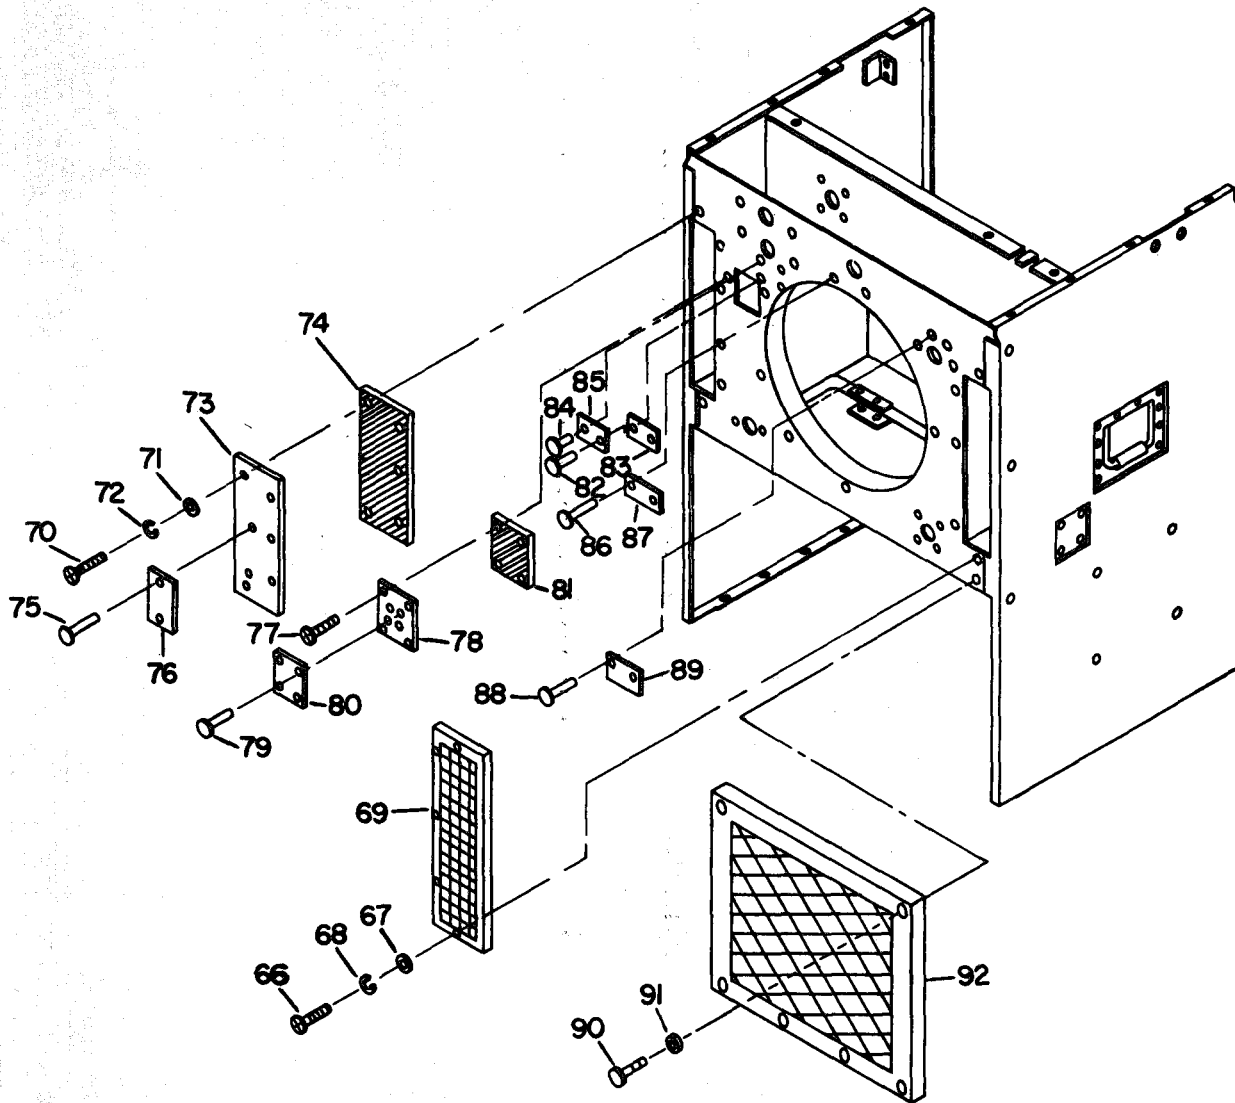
Casing, guards, grilles, drain tubes, panels and filter. (sheet 1 of 2)
